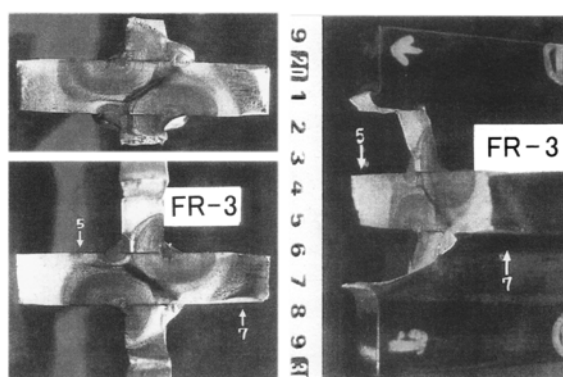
Fracture surface and pass after fatigue test (Type FR, 200 N/mm<sup>2</sup>,  $1.34 \times 10^6$  cycles)
